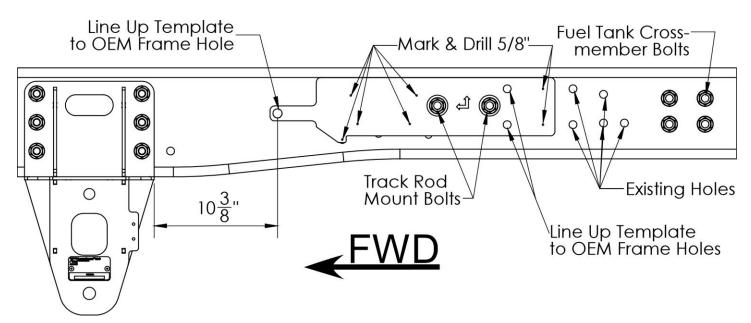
Driver Side Upper Strut Mount Template Drilling
